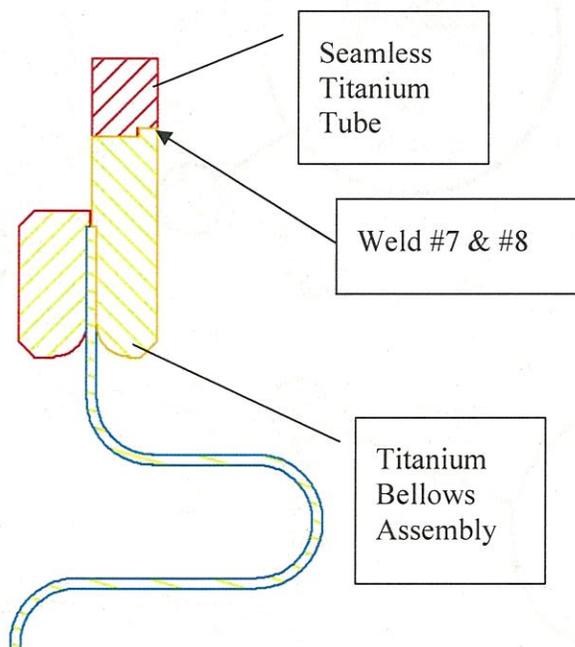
Welds forming the Cavity #7 Helium Vessel Pressure Boundary
